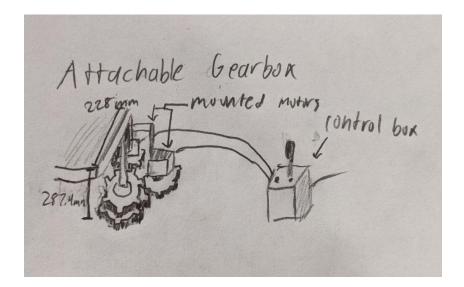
The Attachable Gearbox Design. The motor is attached to the stage on the left. The gears are attached to the stage knob and the motor shaft. The control box on the right has a joystick to control the stage.
